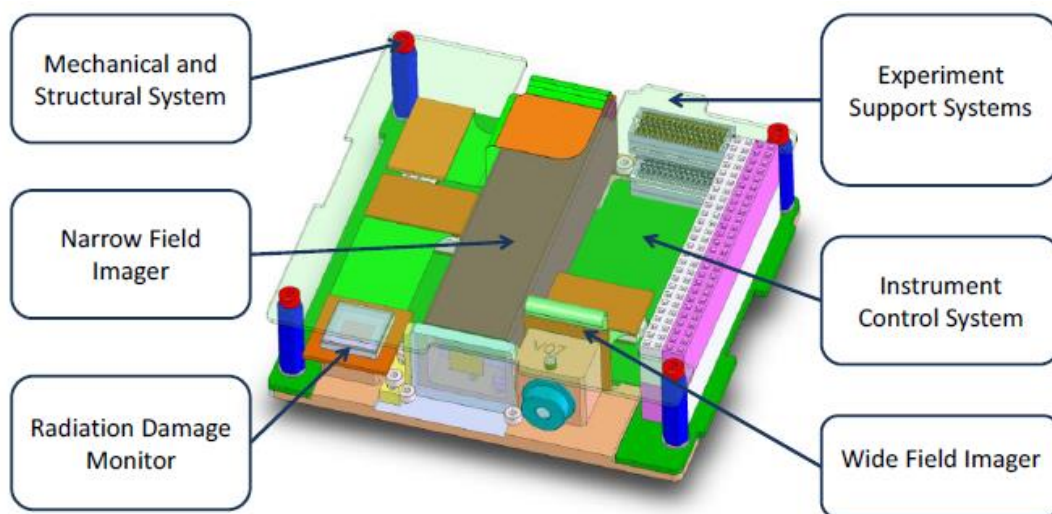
Isometric CAD model of the C3D instrument showing the location of the main parts
